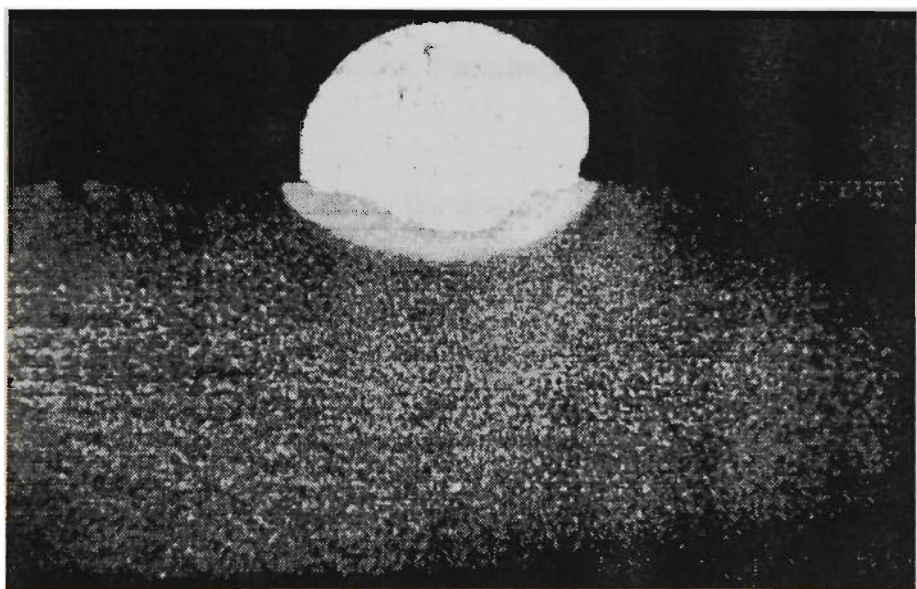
Metallurgical sections of welds according to the various combination of welding process parameters.
